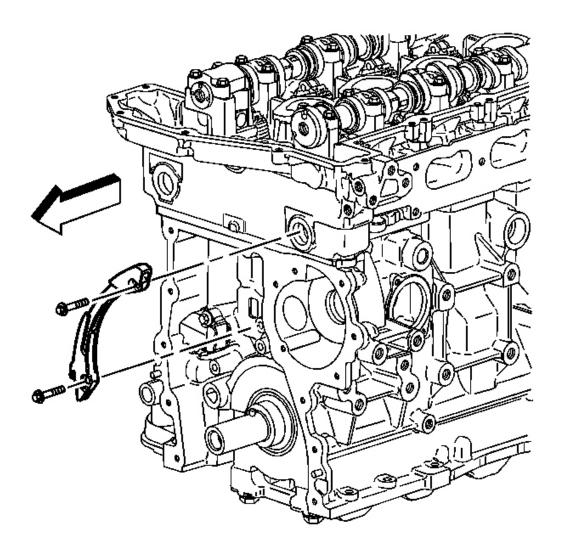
View Of Timing Chain Guide & Bolts Courtesy of GENERAL MOTORS CORP.
